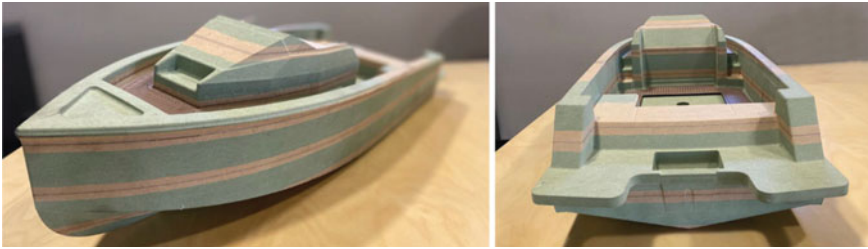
Unfinished prototype manufactured in MDF by a CNC drilling machine
